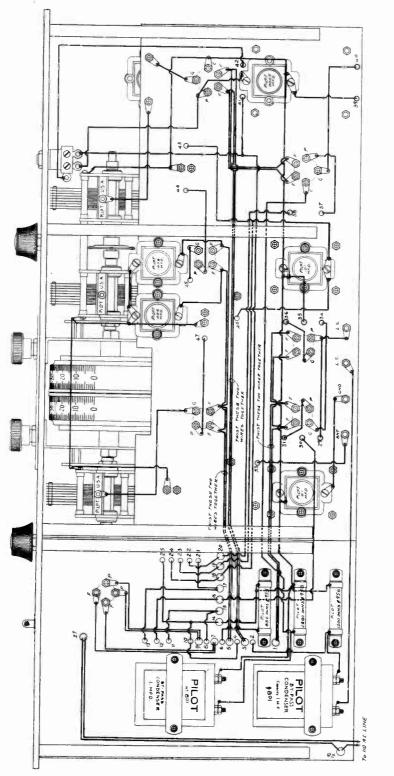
is a line drawing of the bottom of the receiver showing location of all parts that are assembled and wired underneath the sub-panel.
